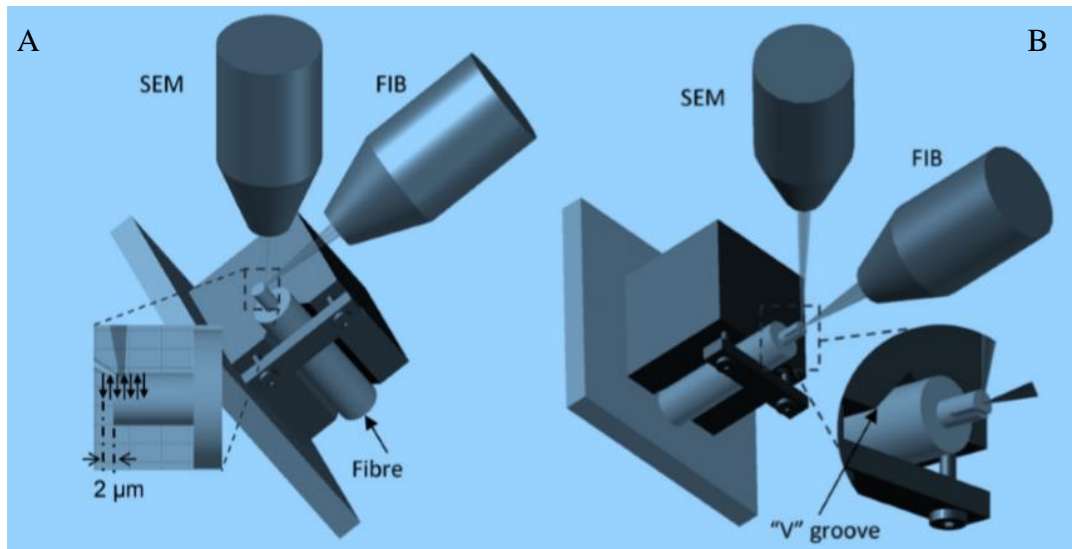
Experimental setup of the FIB machining process: (A) the fabrication of the Fabry–Perot cavity by side machining of the fibre; the incident ion beam is perpendicular to the fibre length direction; (B) fabrication of the 45° reflective mirror on the fibre end face; the ion beam is incident along the fibre axis [178].
